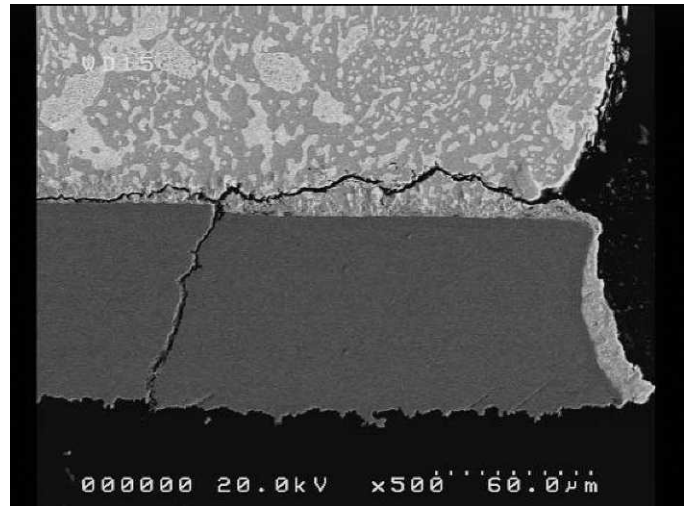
BGA with SnPb on ENEPIG finish, 170°C T_g board.
